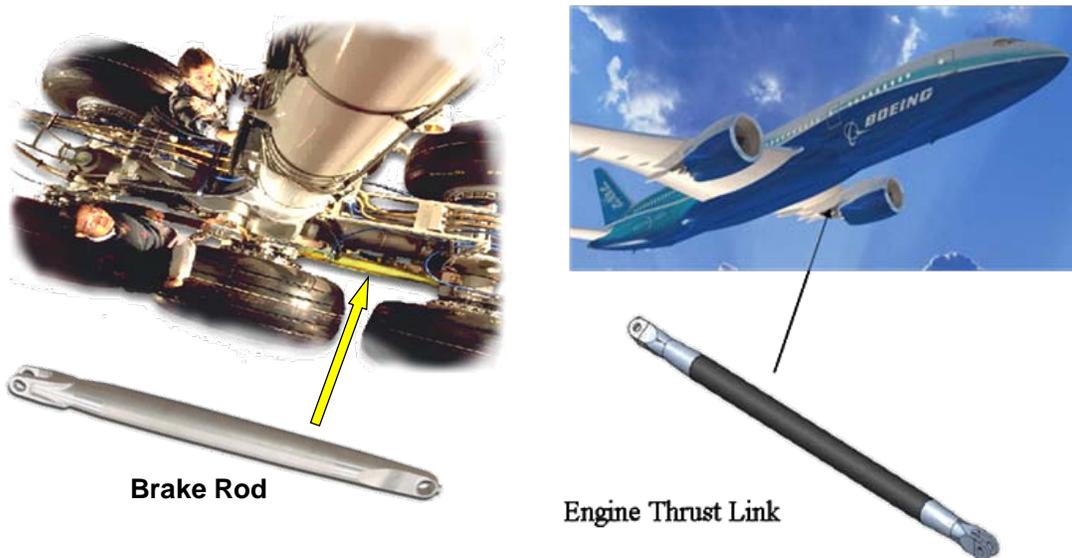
Examples of Potential Applications of TMC Components - Landing Gear Brake Rods (left) and Engine Thrust Links (right) (Courtesy of FMW Composites)
